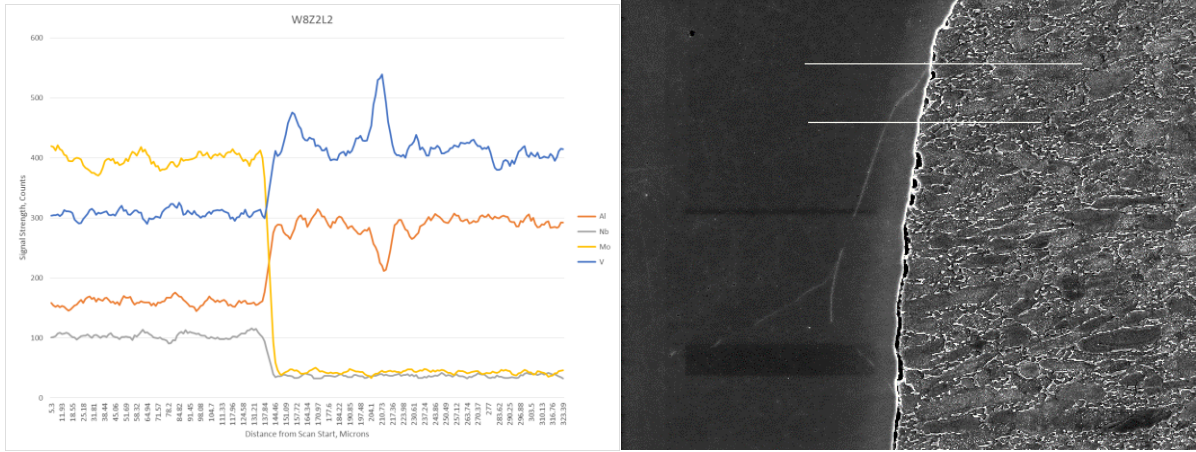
Weld 8, Zone 2, Line 2 (top).
